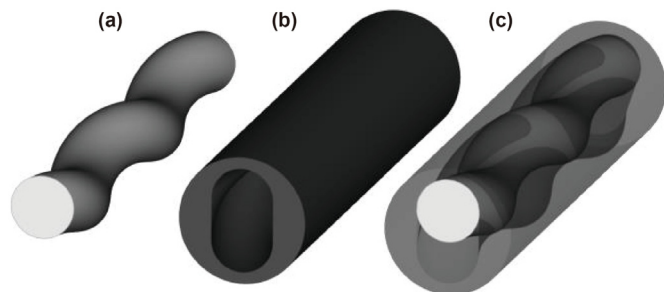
Sketch of the rotor (a), the stator (b), and the rotor mounted inside the stator (c) of a PCP.
